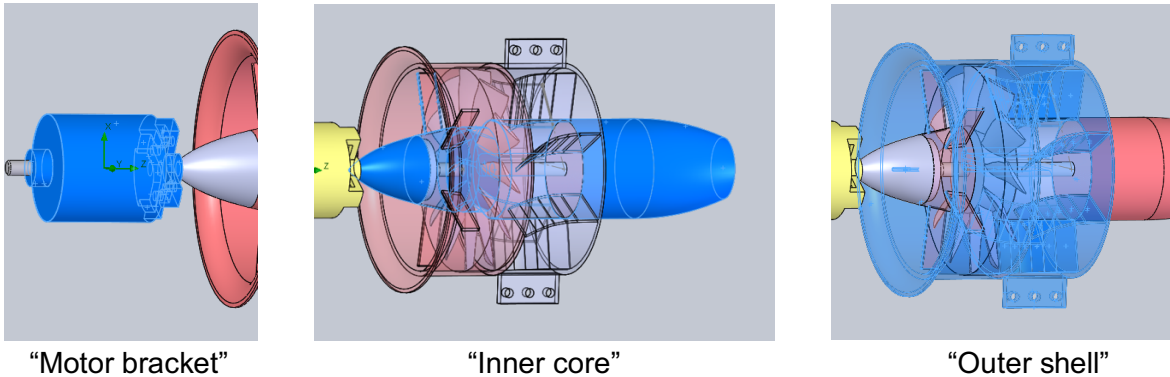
Blue high-lighted areas are: Motor bracket, Inner core, and Outer shell
